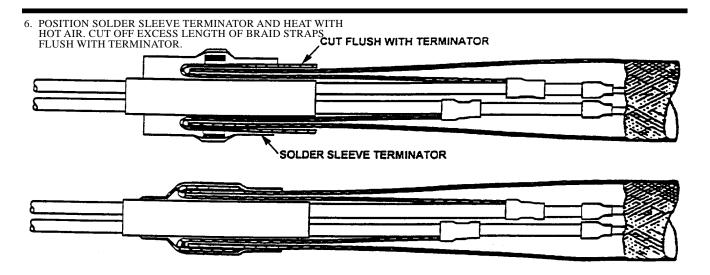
Termination of Bundled Shielded and Jacketed Cable (Sheet 2)
